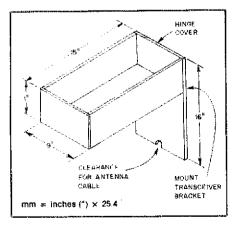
Construction details of the mobile desk. The dimensions should be adjusted to suit your car and rig.
